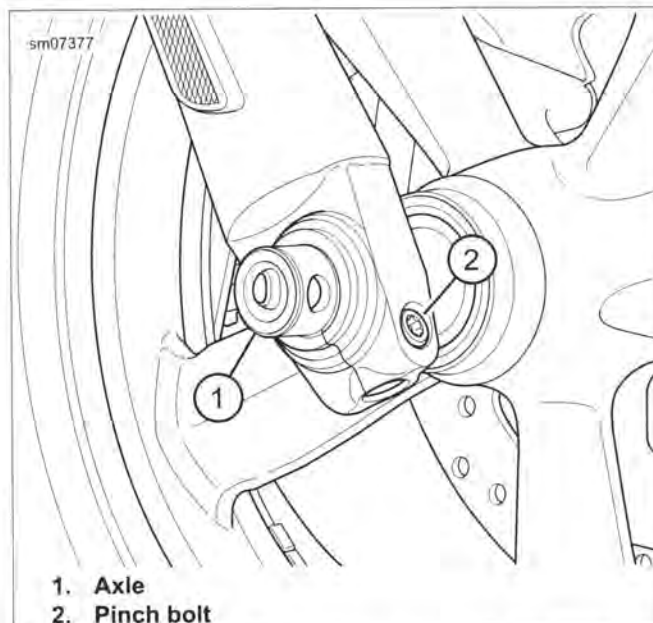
Front Wheel Mounting: FLD (Right Side)
